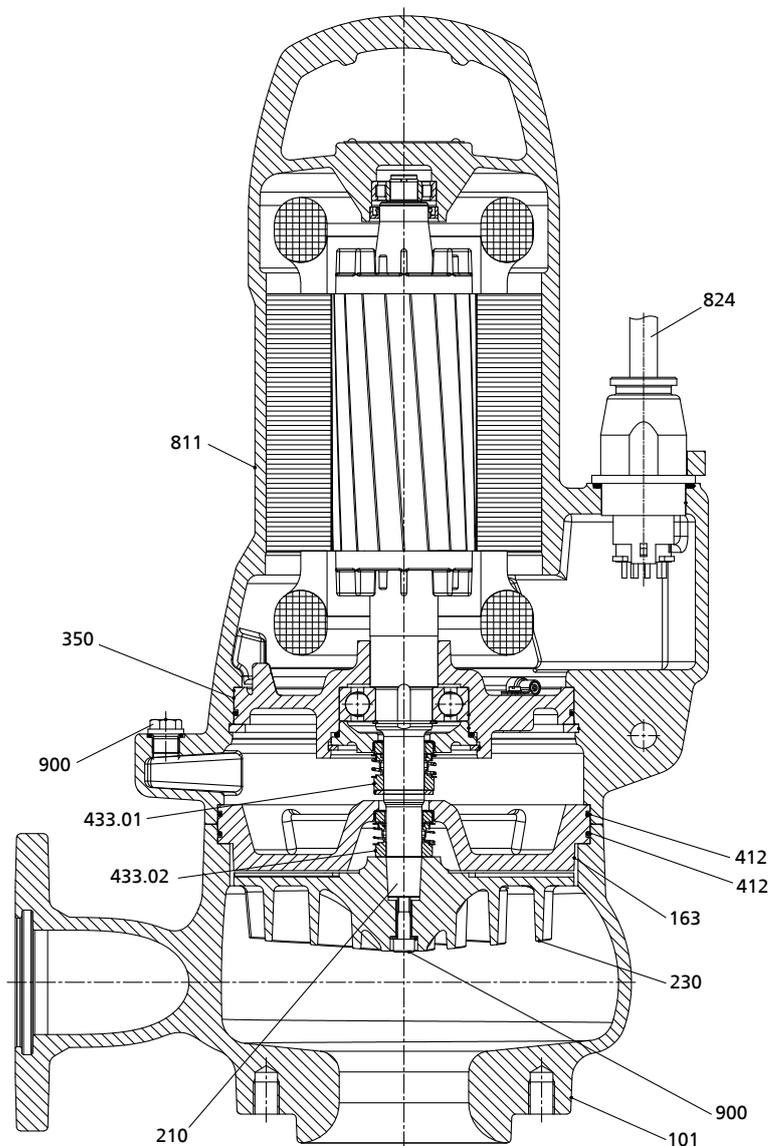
General assembly drawing, example: Amarex KRT F65-215
